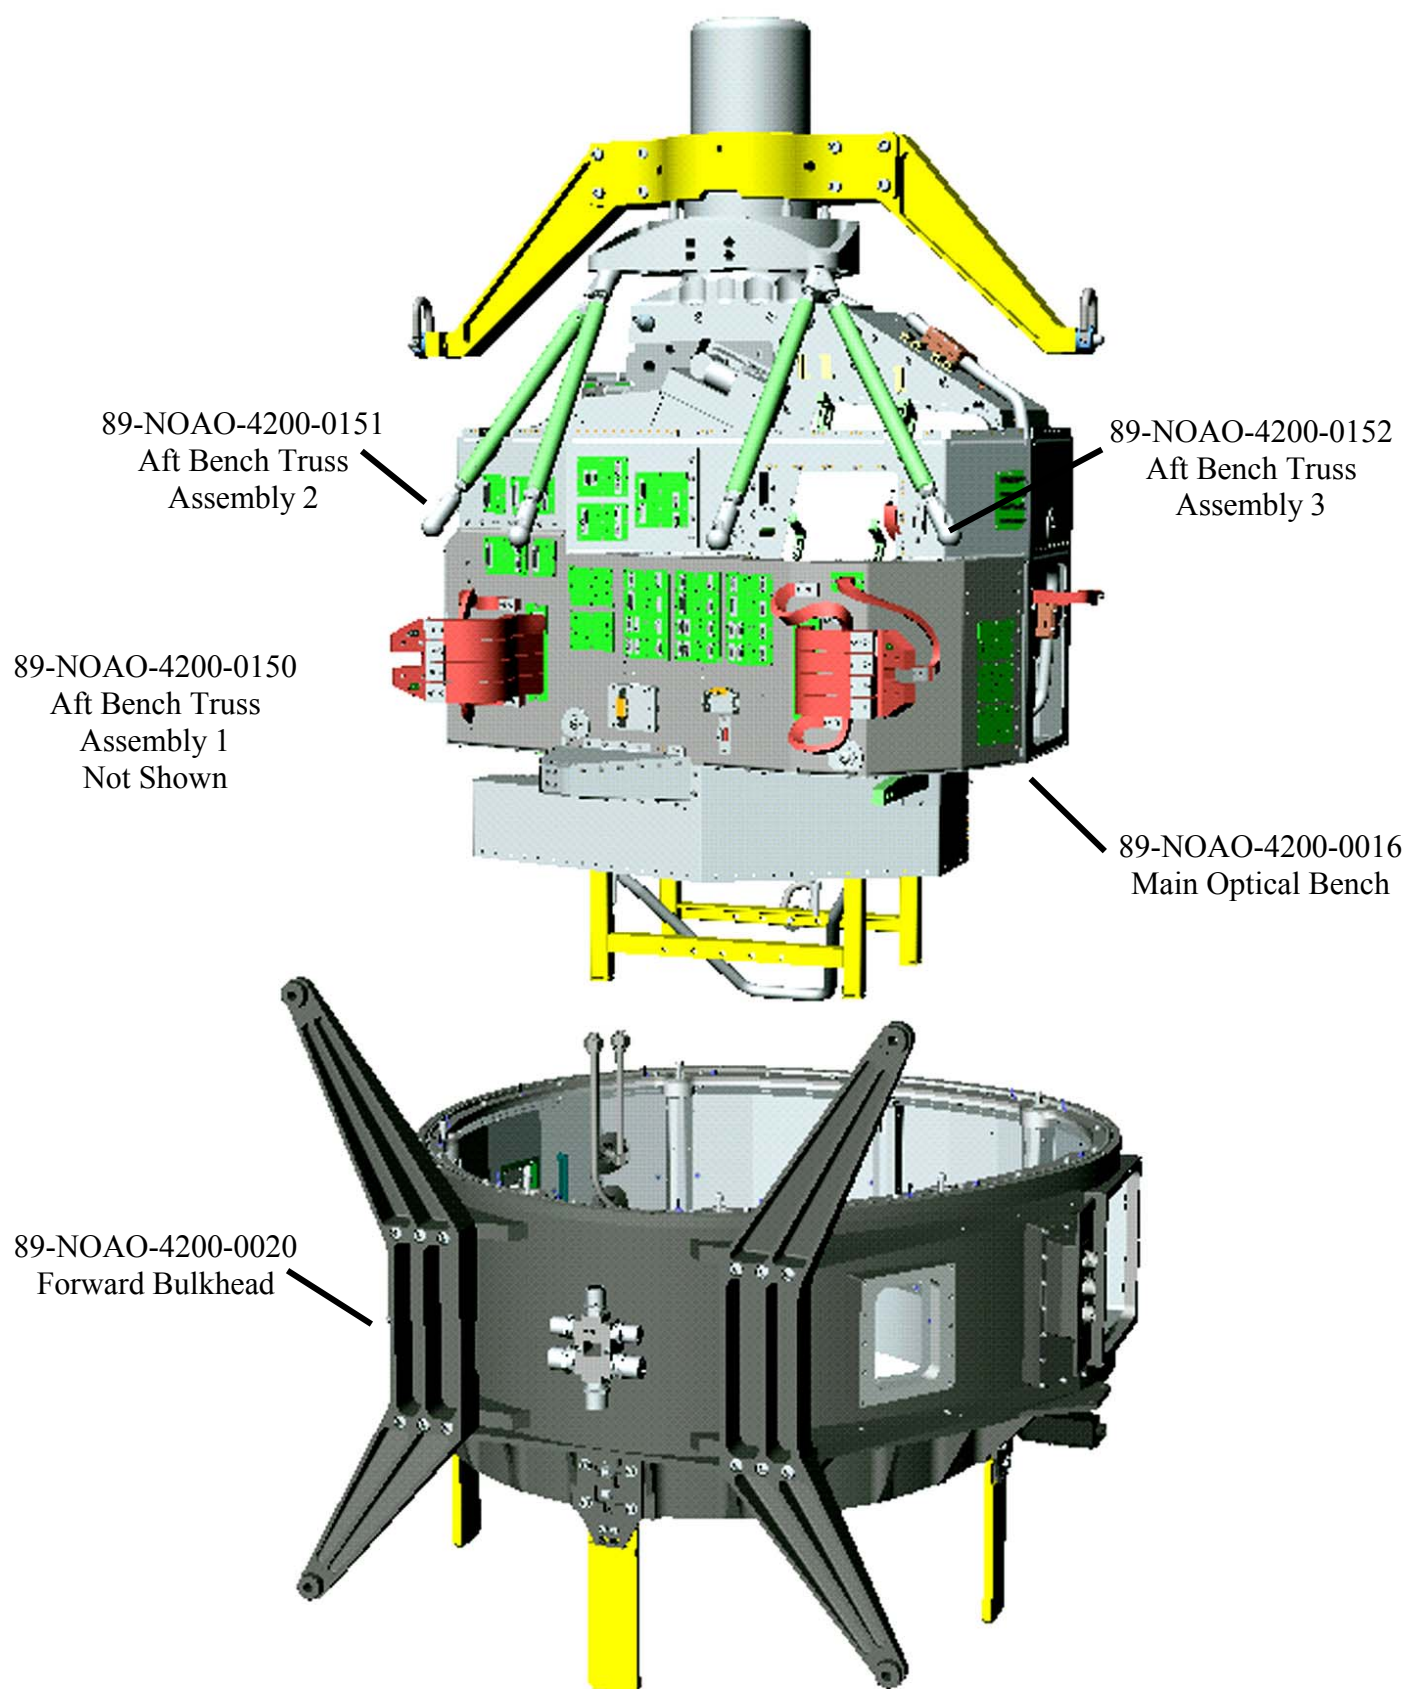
Remove Aft Bench Truss Rods and lift Main Bench from Bulkhead.
